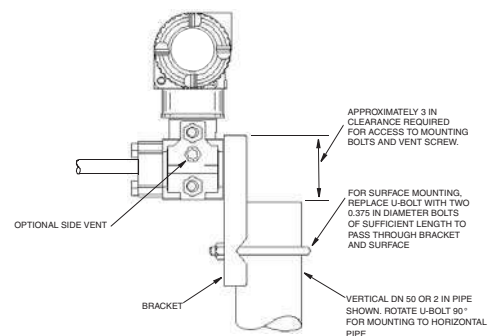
Pipe or Surface Mounted Transmitter Using a Standard Bracket
